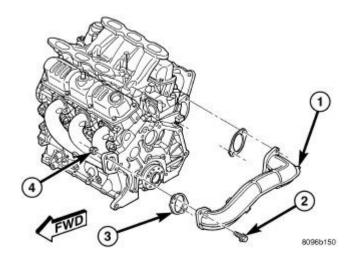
CROSS-OVER PIPE Courtesy of CHRYSLER LLC
